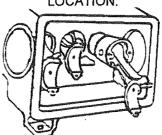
REMOVAL OF CONNECTING ROD, CROSSHEAD ASSEMBLIES
